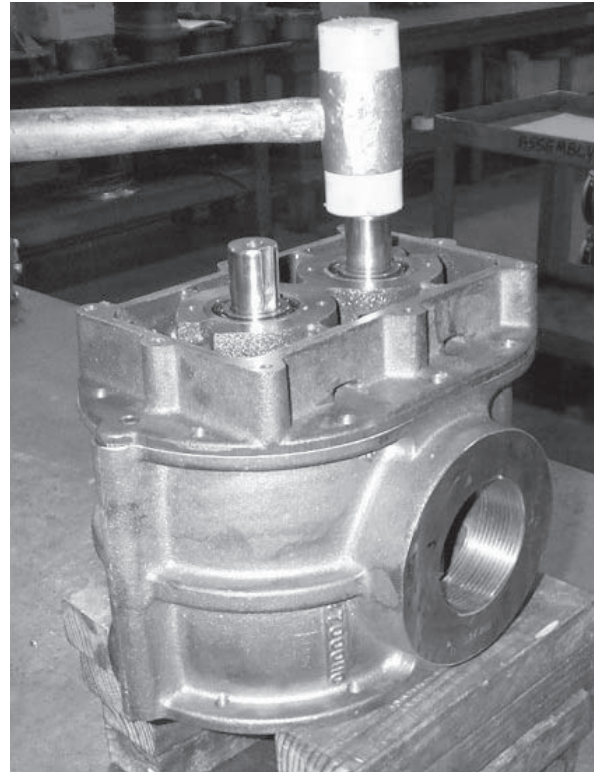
Driving Rotors Out Using Soft Mallet
